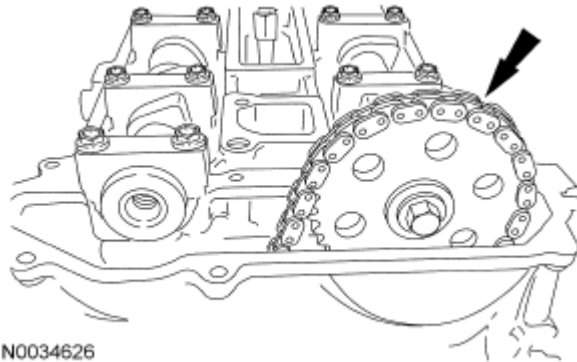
Locating Timing Chain On Intake Camshaft Drive Gear
